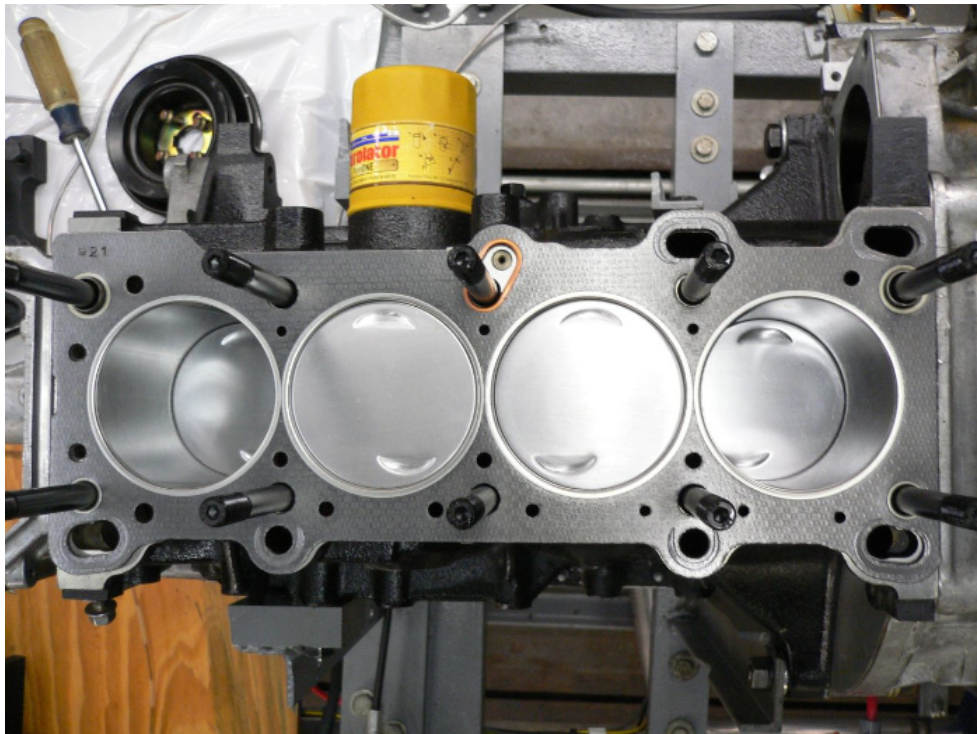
Installed Custom Forged Flat-Top Pistons with Valve Relief
